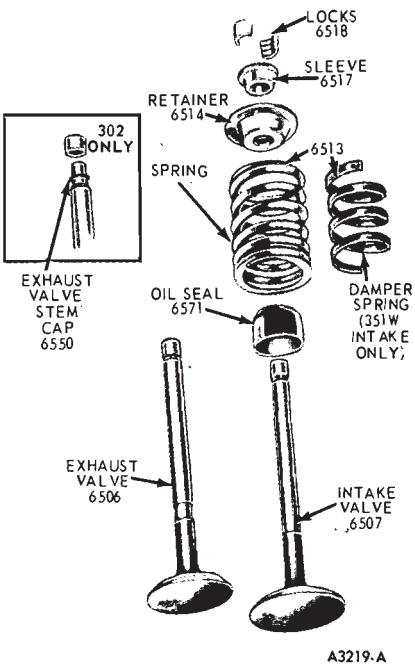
Valve Assembly—302-2V and 351-W Engines
